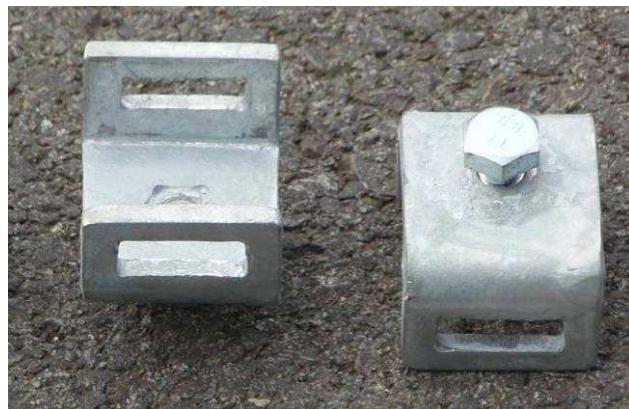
The 'standard' clamp, used to attach the handles and all tools to the main frame / toolbars.
